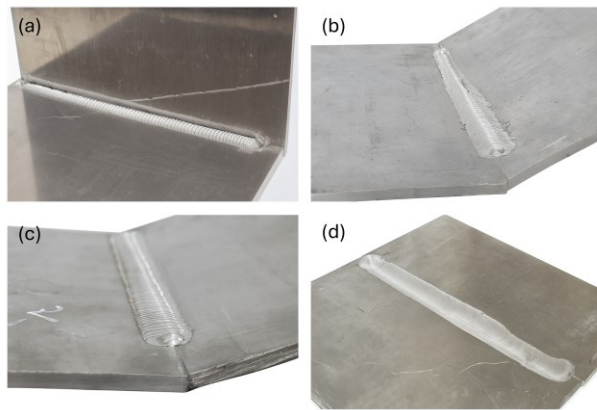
Weld surfaces obtained for different joint configurations: (a) 90°, (b) 150°, (c) 165°, and (d) 180°. All joints exhibit a smooth surface appearance with no visible defects.
